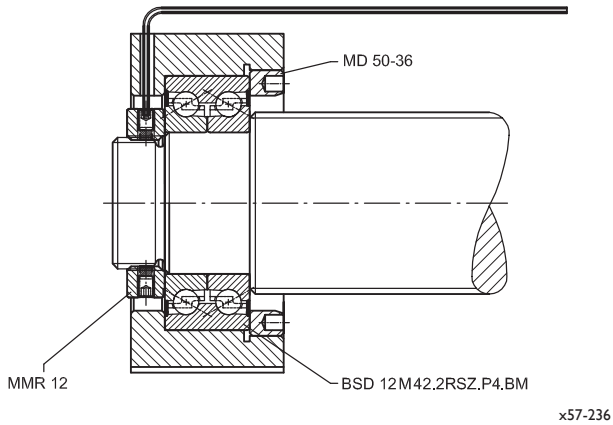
Ball screw bearing with components from the IBC modular system
